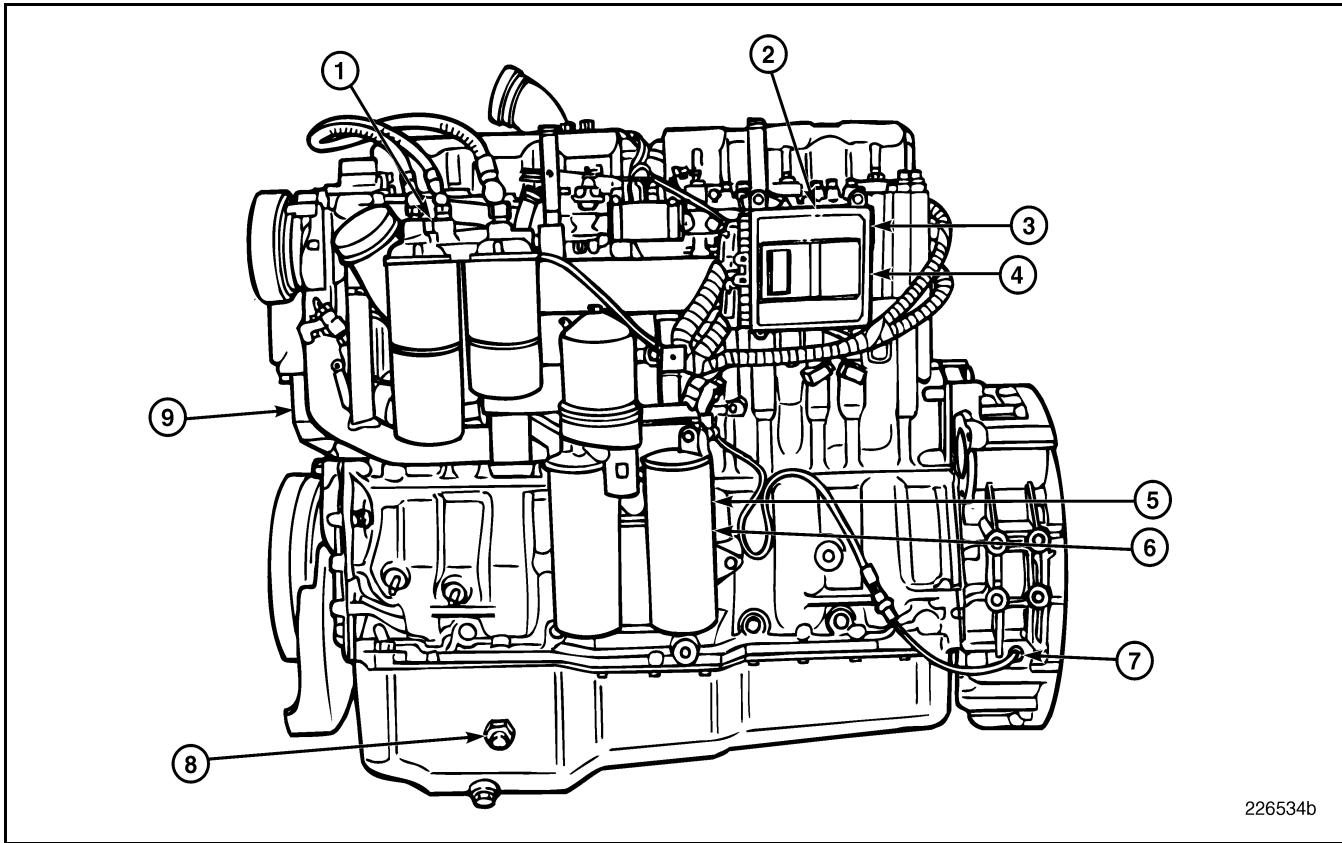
V-MAC III Engine-Mounted Sensor Locations (with Left-Side Mounted EECU)
